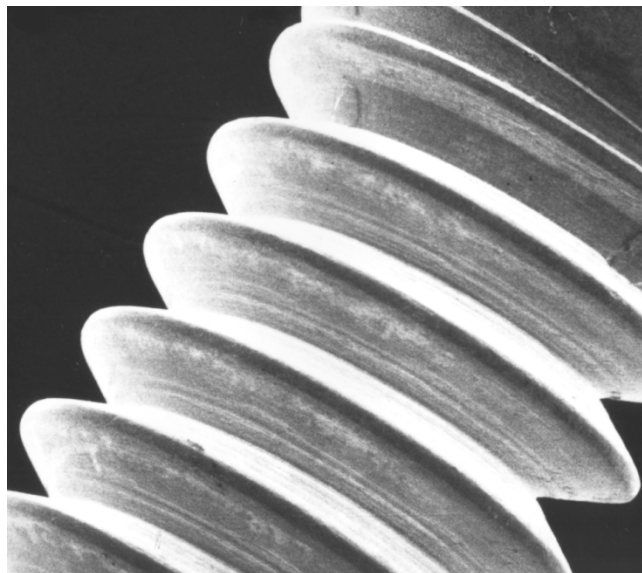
Example of Deburred Thread Quality for Precision Miniature Parts
